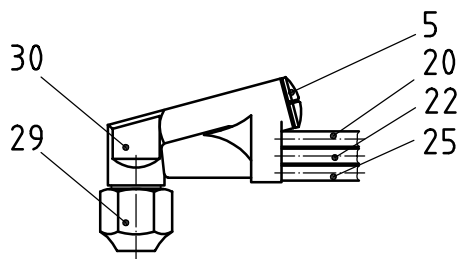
Combination of welding and cutting blowpipes
